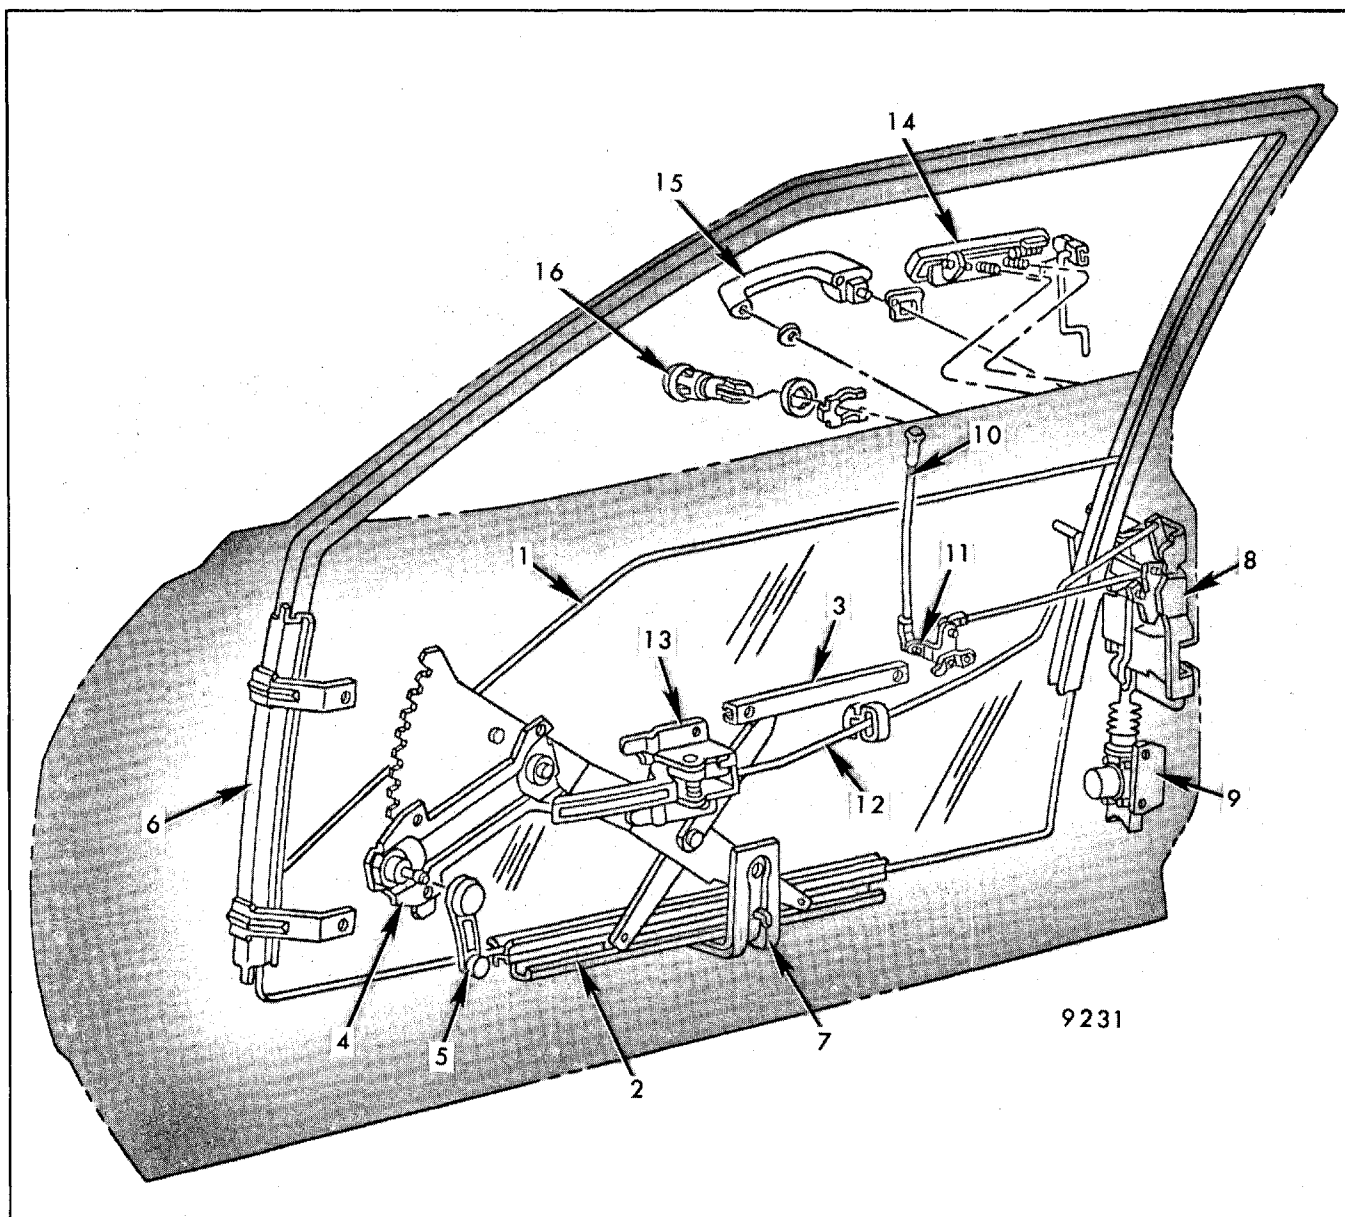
Front Door Hardware - "B, C" Styles (Coupe Door Shown, Sedan Door Similar)
